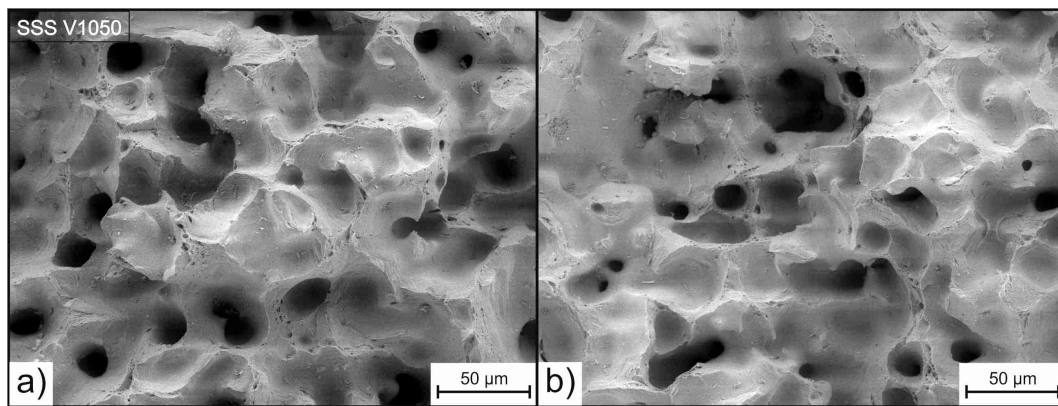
Overview of fracture surface, V1050 specimen
